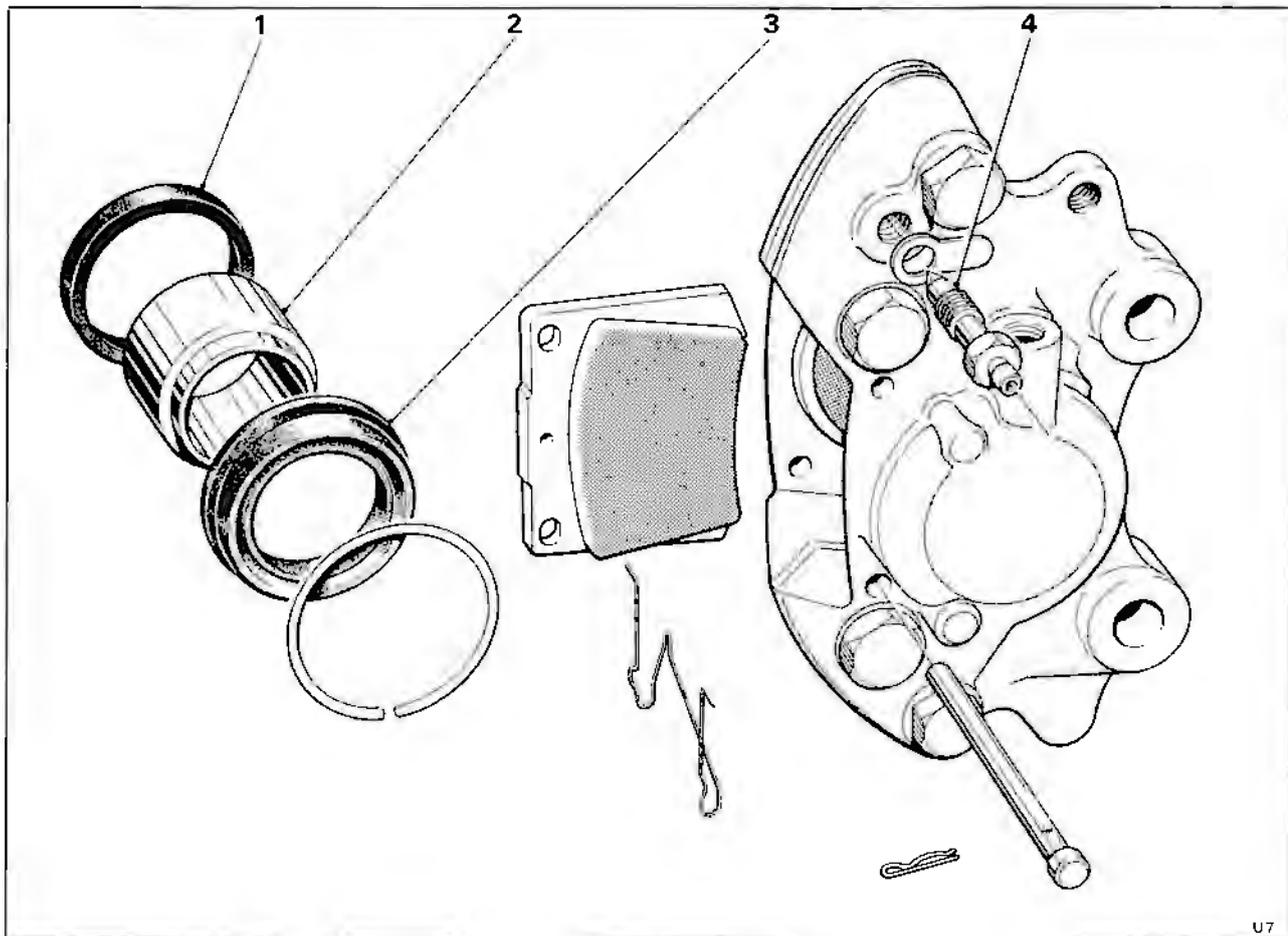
Front wheel brake caliper (left-hand trailing caliper shown)
